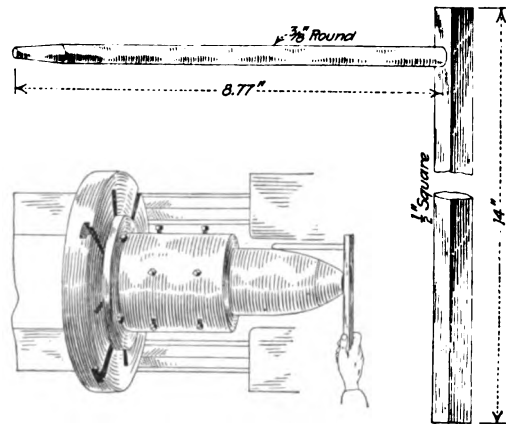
GAGE FOR MEASURING LENGTH OF MACHINED CONTOUR
